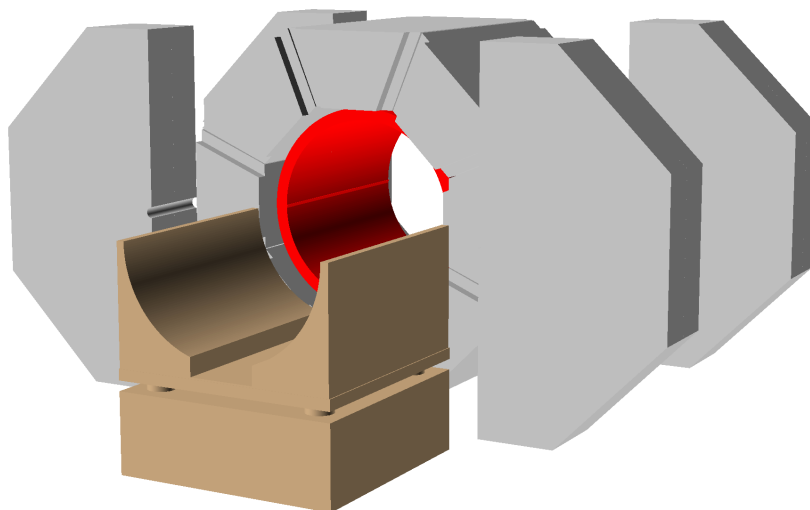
(Var-1) The magnet is transported in the axial direction to the working position. The location of the guiding equipment (rails and rollers) to be defined.
